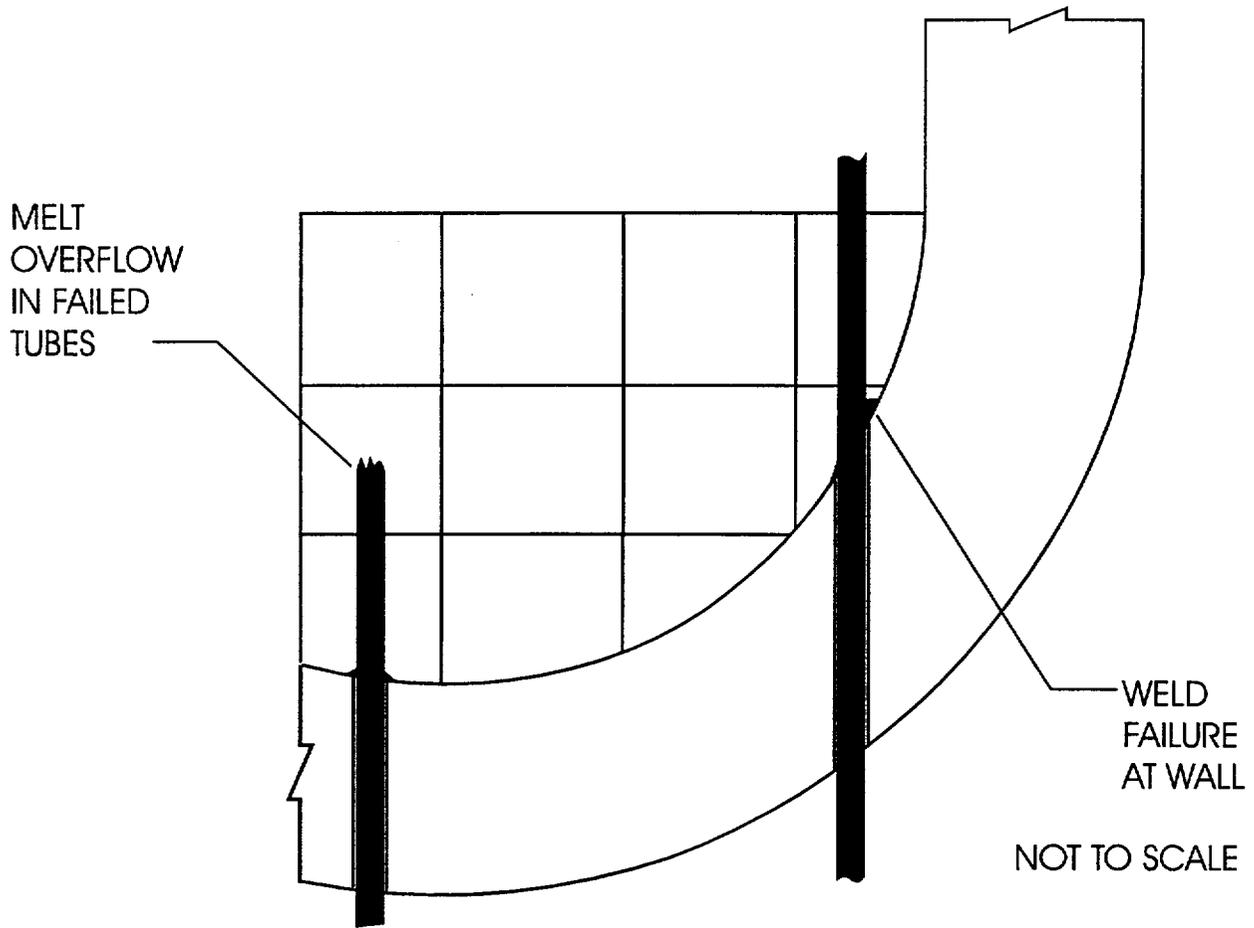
Instrument tube failure by creep-rupture of welds and by melt overflow can be represented
